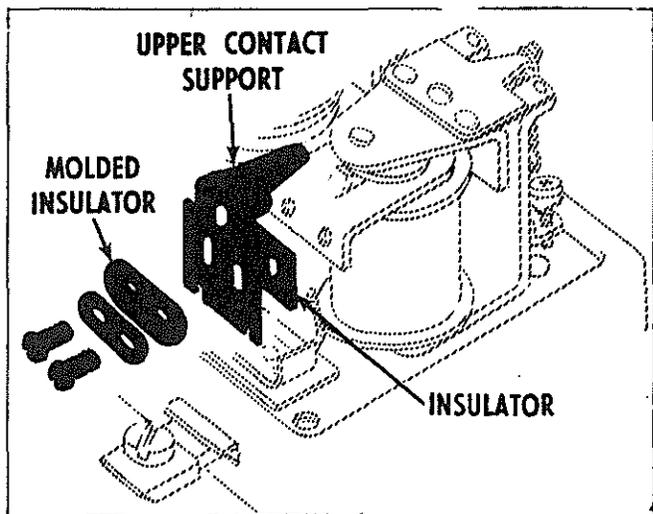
Disassembly of upper contact support for cleaning or replacement.
